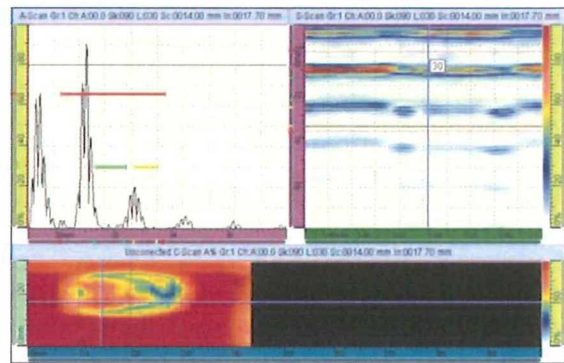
PA scan of USW140911-08 which is welded with 2,000 [J]. The A, S, and C-scan show that the two ED strips have merged but the weld quality has deteriorated.
